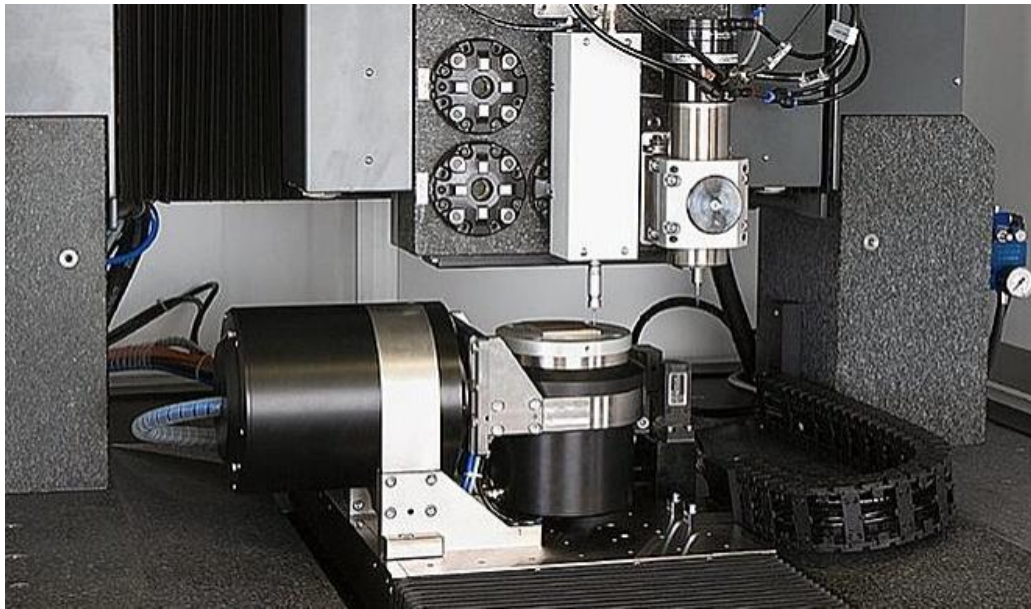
5-axis micromilling machine including tilt-swivel unit, touch probe for workpieces measurement and mechanical machining spindle. Courtesy of Kugler GmbH.
